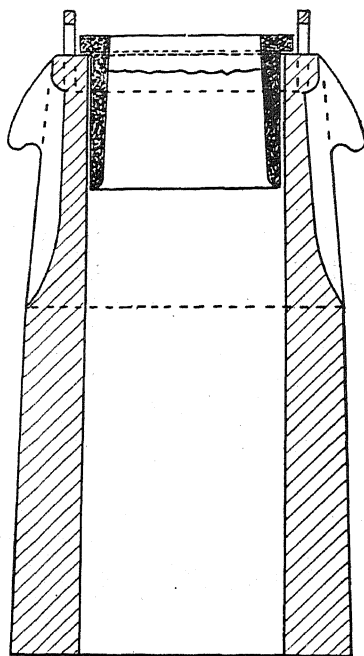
SINK-HEAD APPLIED TO GATHMANN INGOT MOLD.
